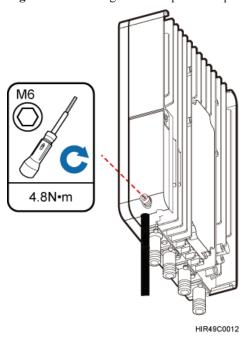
Closing the cover plate of a pRRU cabling cavity
